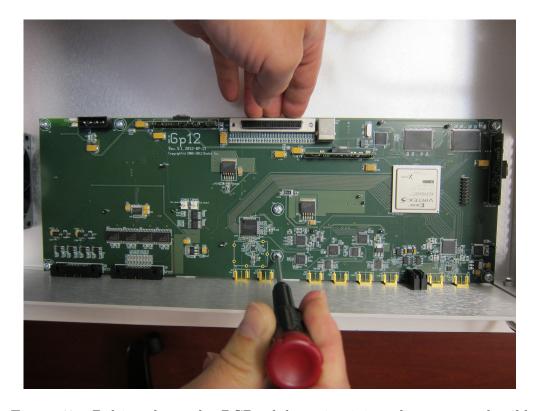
Bolting down the PCB while maintaining alignment and mild forward pressure. $\,$
